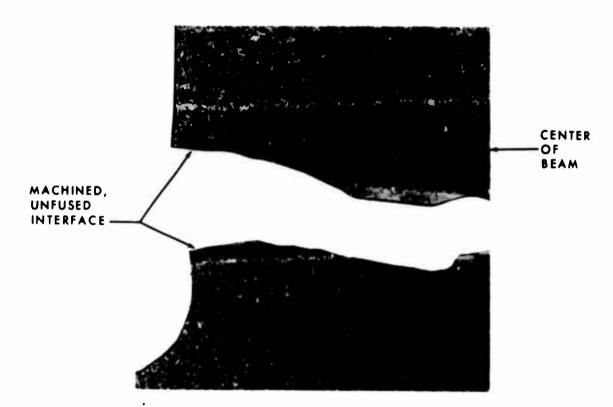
Electron Beam Weld - Gear/Flange, Second-Row Pinion.
